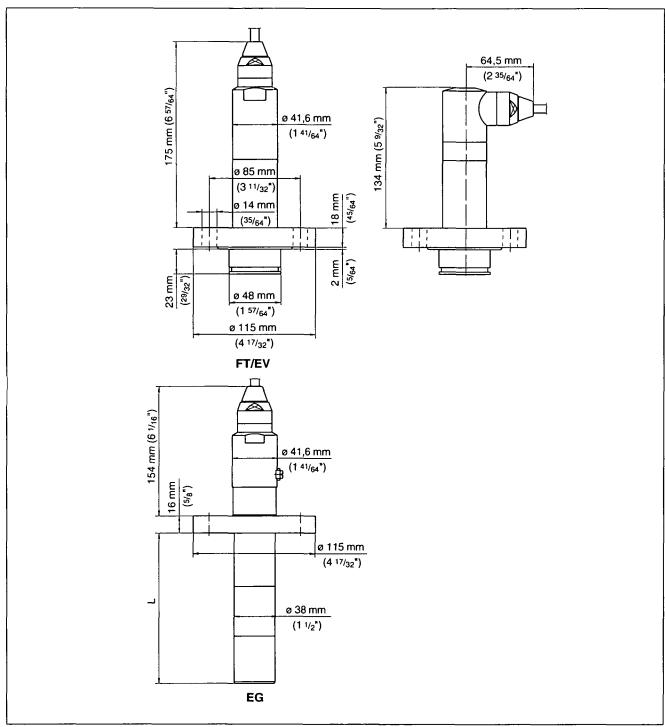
VEGABAR 74 - extension fitting for paper industry: EV/FT = absolutely flush for pulper (EV 2-times flattened), EG = extension for ball valve fitting (L = order-specific)
